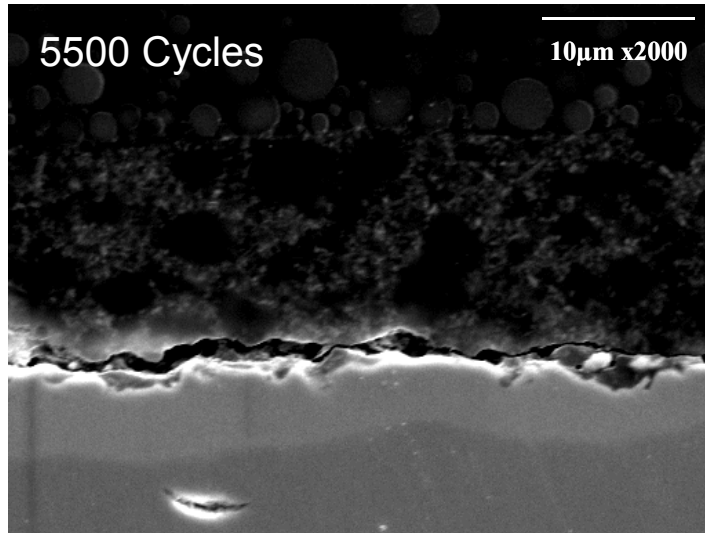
Failure Mode for Underfilled BGA Cracking/Delamination between the Soldermask and Copper Traces
